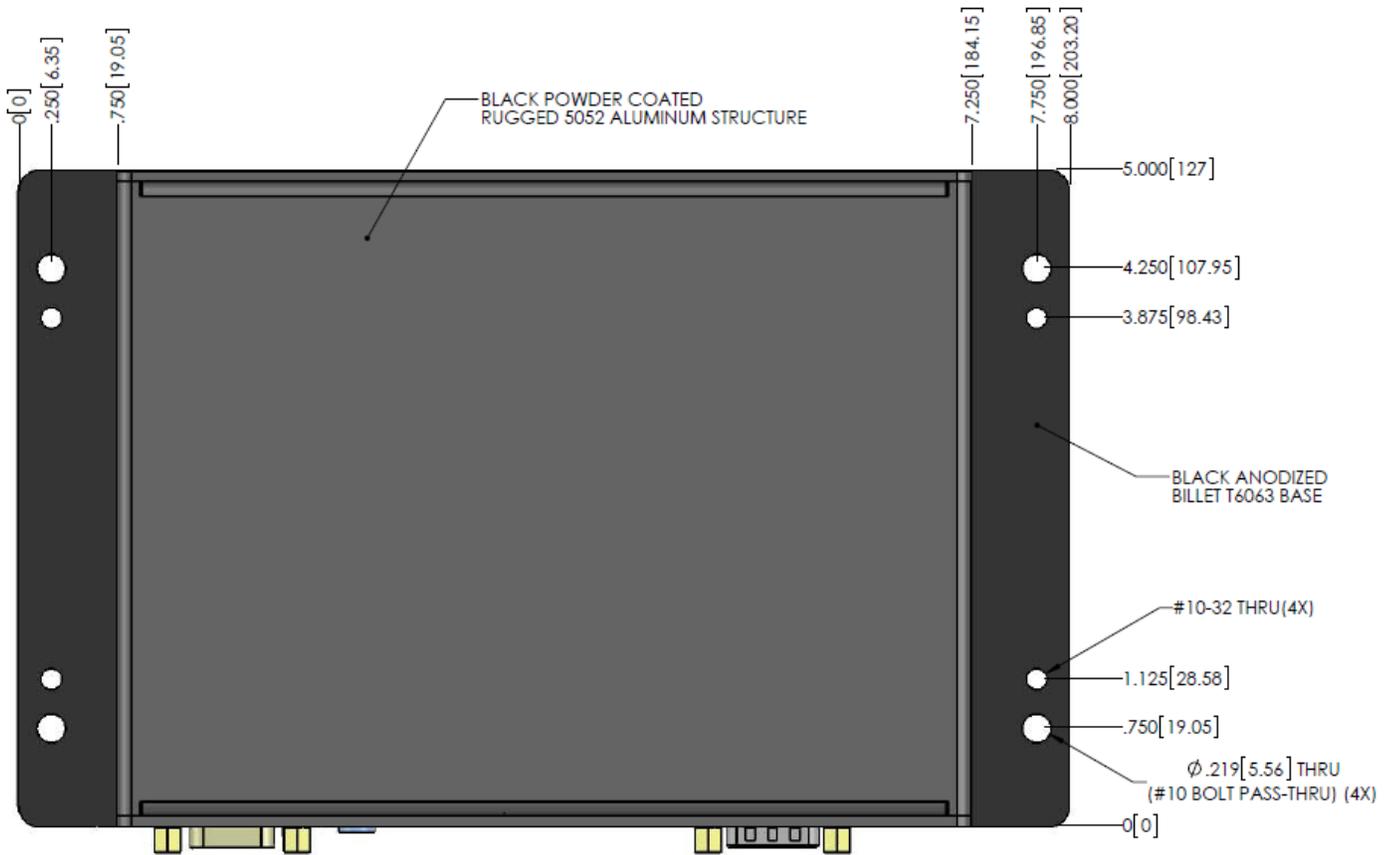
Top Side Mounting Board with Dimensions.
